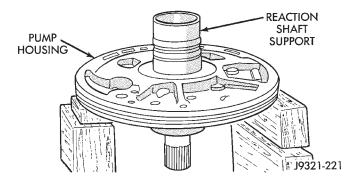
Assembling Reaction Shaft Support And Pump Housing
